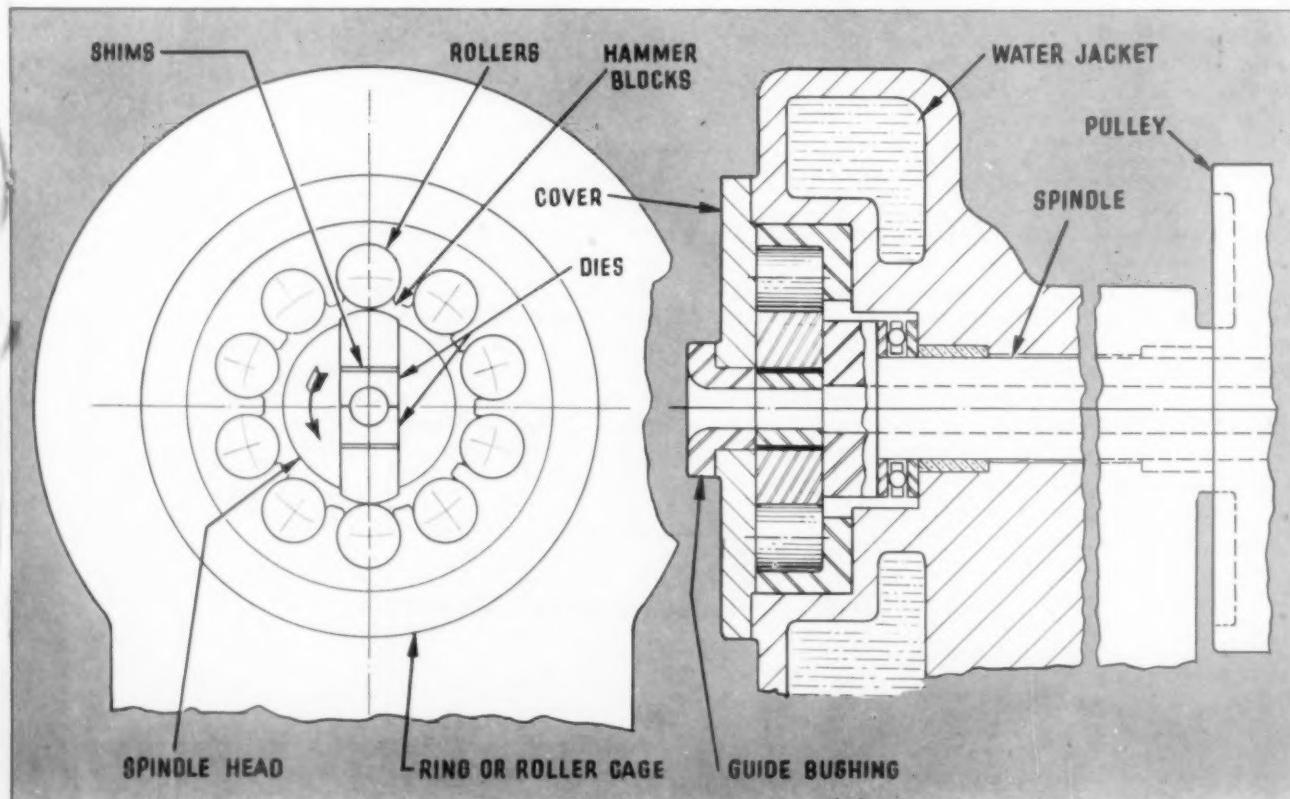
Details of rotary swaging machine. At left, head-on view, cover plate removed, dies closed by rollers. At right, cross section through spindle, with cover plate in place.
